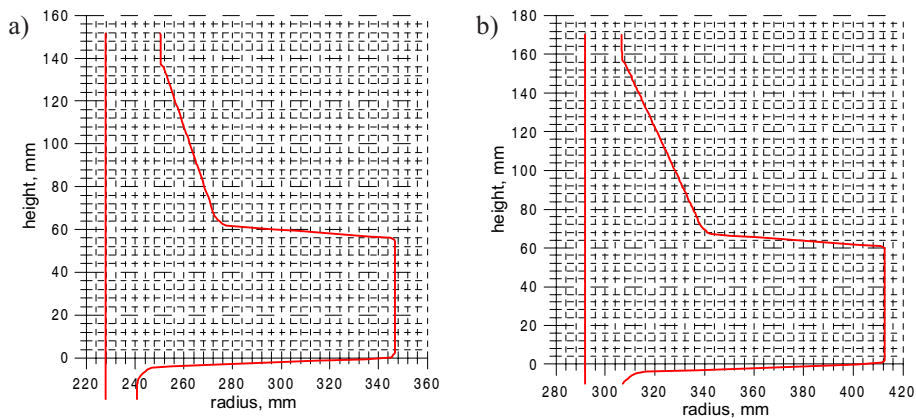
Profile and dimensions of the vertical rolls for rolling of: a) welding neck 20" ring; b) welding neck 24" ring
